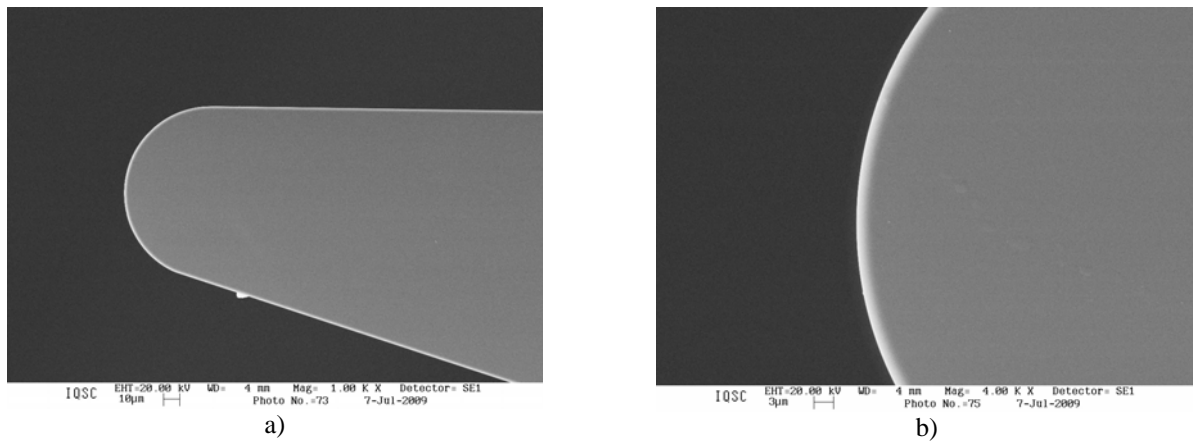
Scanning electron microscopy showing a new diamond tool; a) tool point geometry and; b) cutting edge detail.
